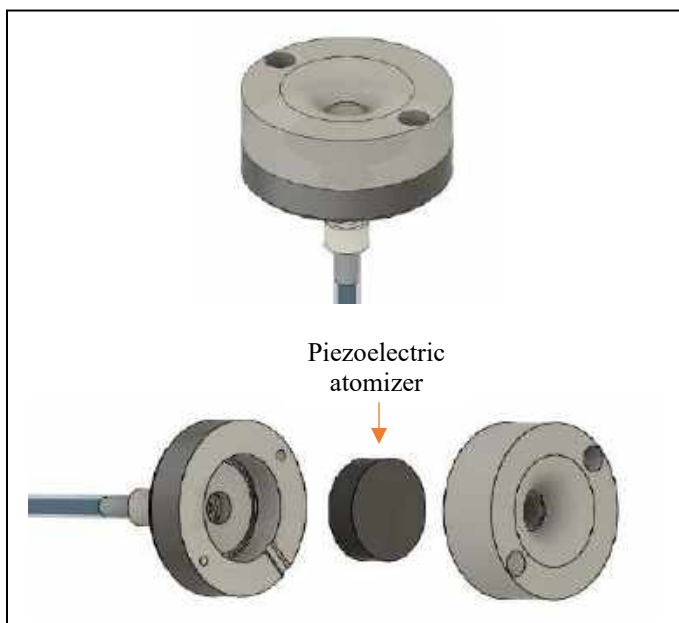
Piezoelectric atomizer holder with attached water tube with luer lock connector. Front view (top) and exploded view (bottom).
